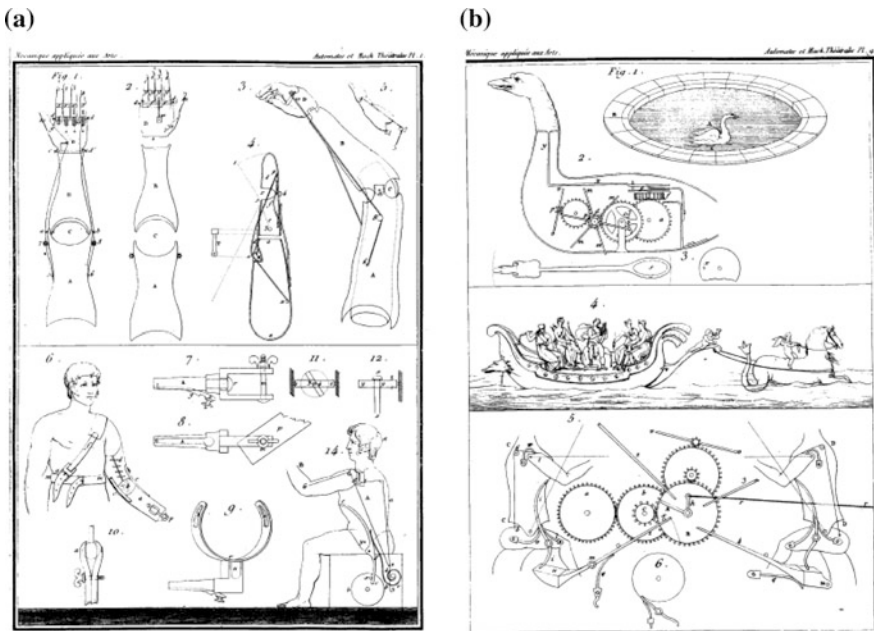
Examples of machine drawings in the book on Machines for Automata and Theatre by Borgnis (1820b): a basic components; b mechanical design of past automata
